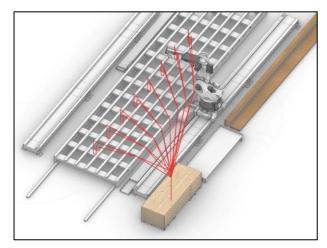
Diagrammatic overview of the robotic assembly process with the highlighted tool path of a robot for handling a stack of CLT panels during assembly
